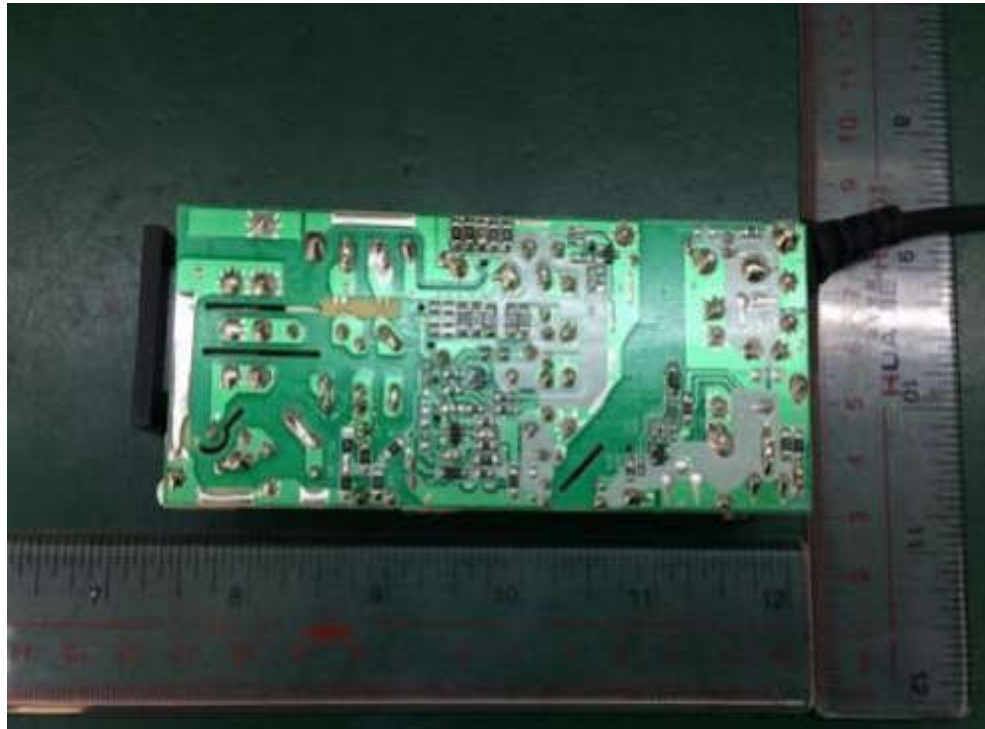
PCB trace side view of all unit (Fuse:F1 and F2(with TVS2, TVS3, TVS4))
